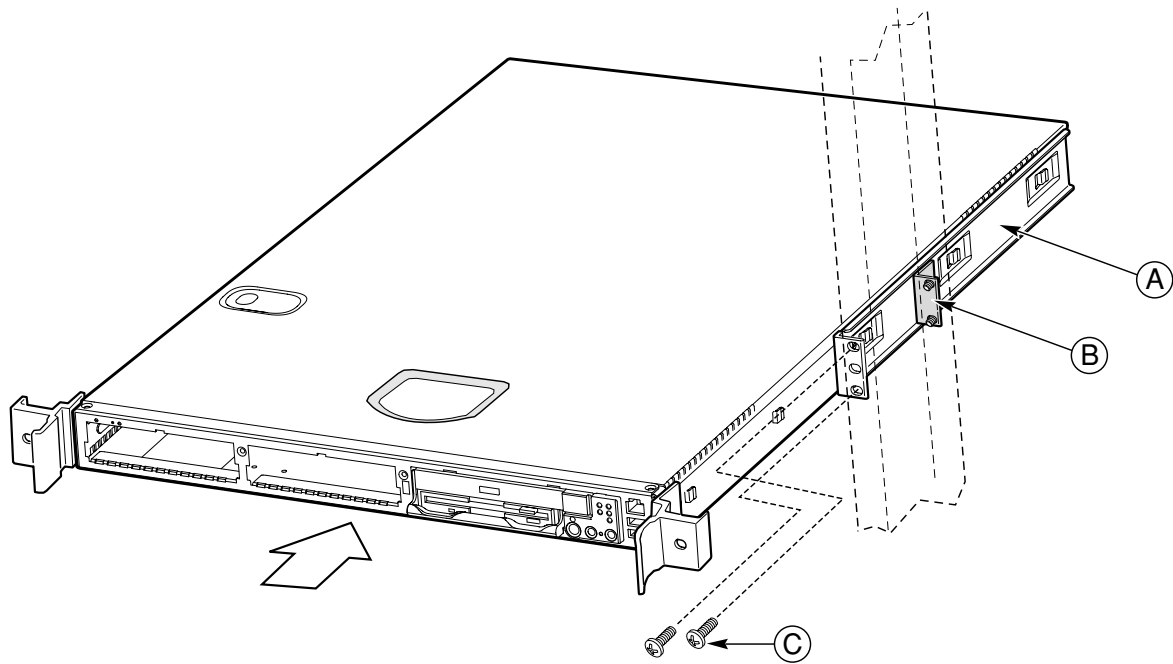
L Brackets Inserted into Chassis Mounting Brackets (Rear View)
